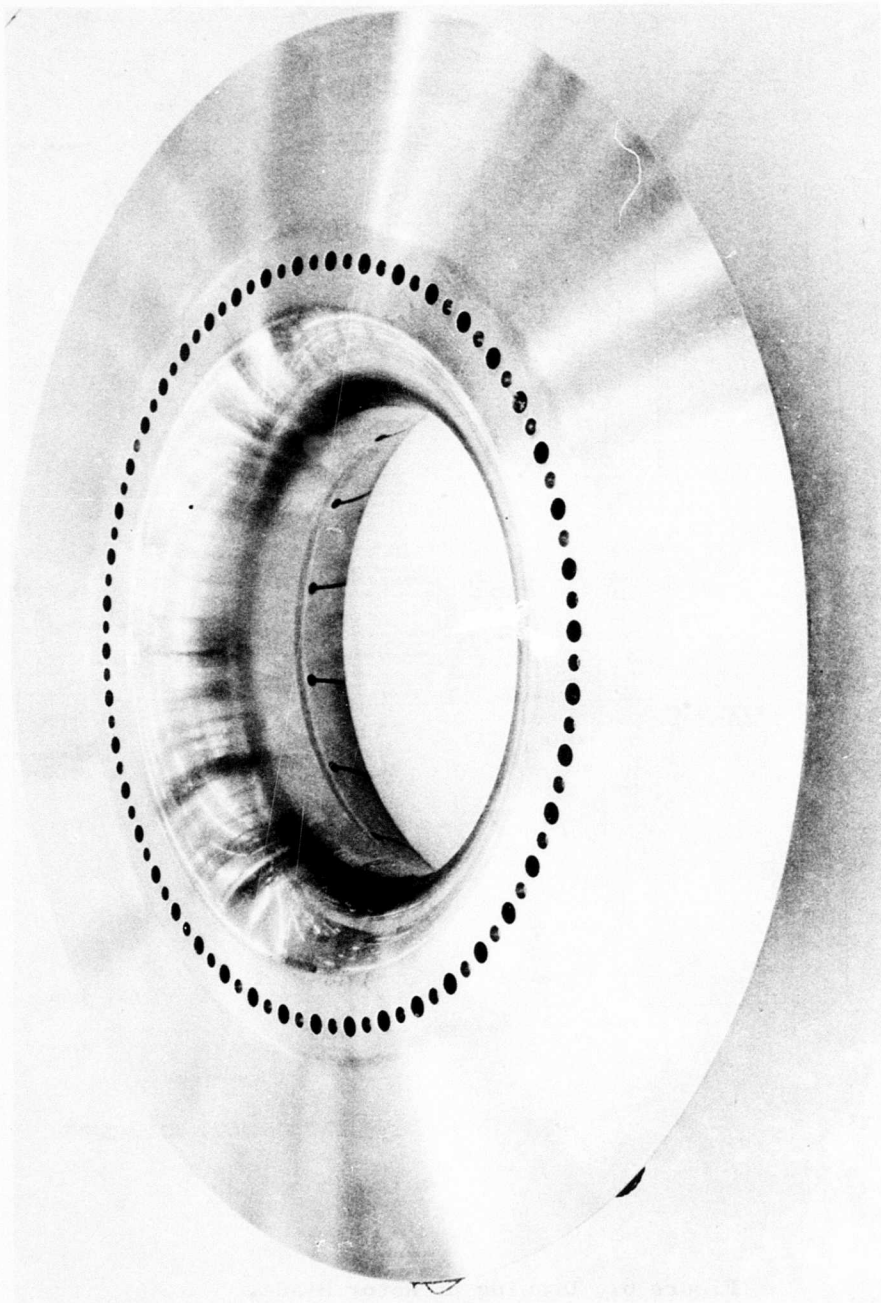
Aft View of Rotating Shroud for Phase III Rotor.
